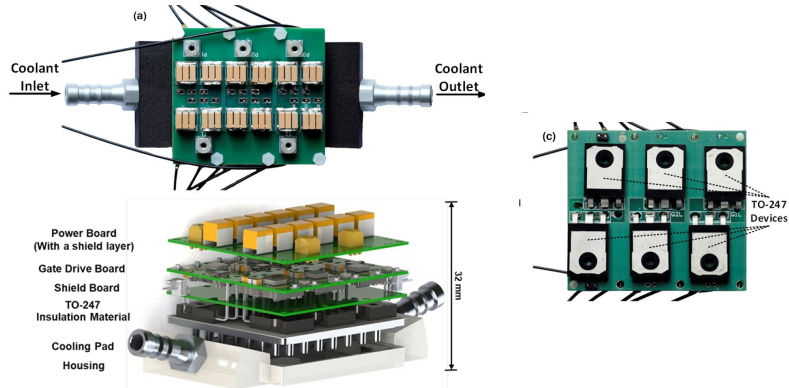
Pin fins design liquid cooling system 3D model and TO-247 packaged power device board.
